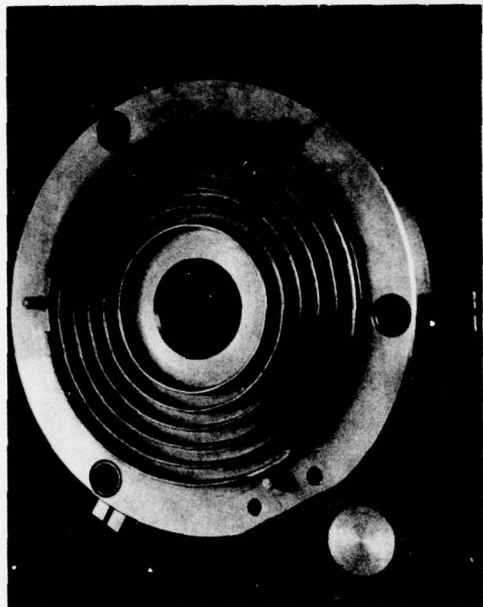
VIEW OF COMPONENTS OF FLEXIBLE THRUST BEARING LLF-2T. - SPIRALLY GROOVED MEMBRANES, SPIDER SPRINGS, AND SUPPORT PLATE WITH CONCENTRIC RIDGES
